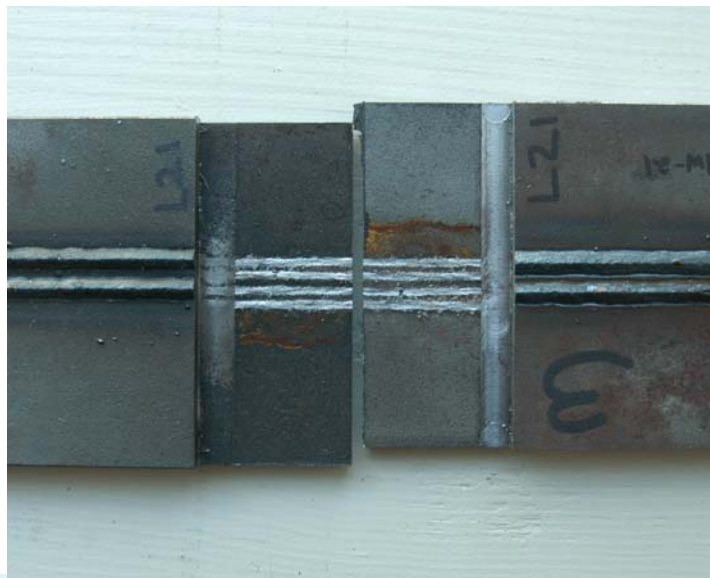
Typical Failure in SWT-2W Specimen
